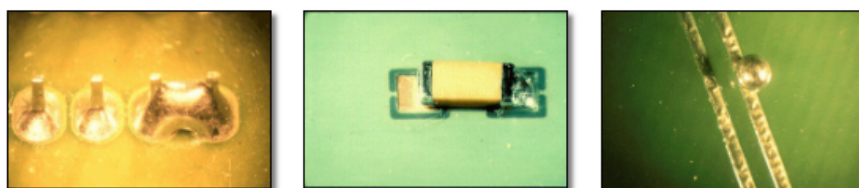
Examples of common types of soldering defects. Bridge (left), Skip (center), Solder ball (right), taken from [11]
